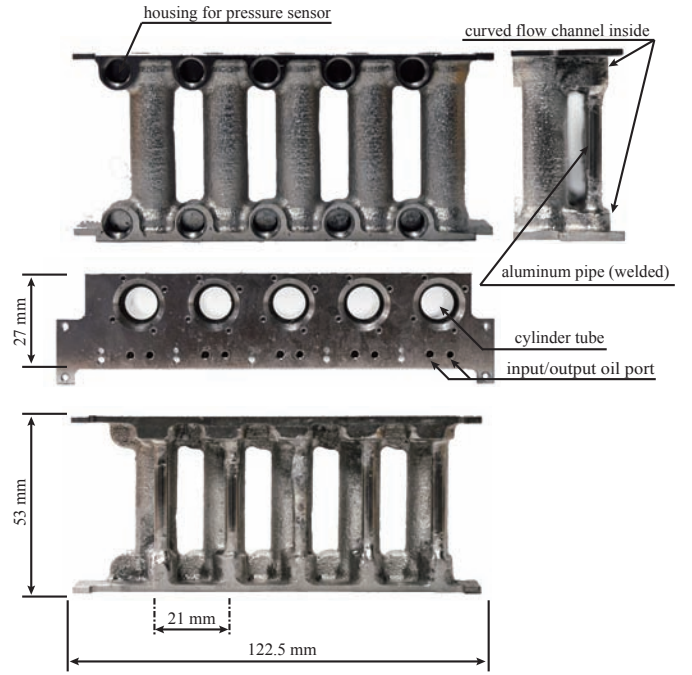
Single Cylinder Manifold. The direct casting technique enables complex modeling that realizes light weight and strong structure. It also enables smoothly curved flow channel that reduces flow resistance.
